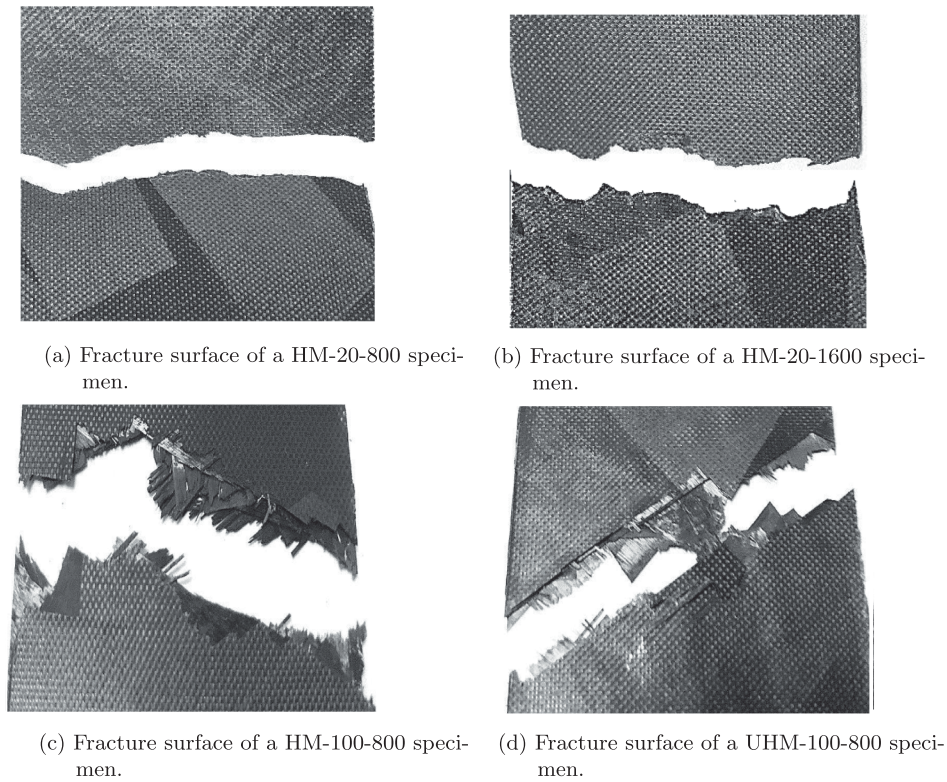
Fracture surfaces of specimens from the different plate configurations.
